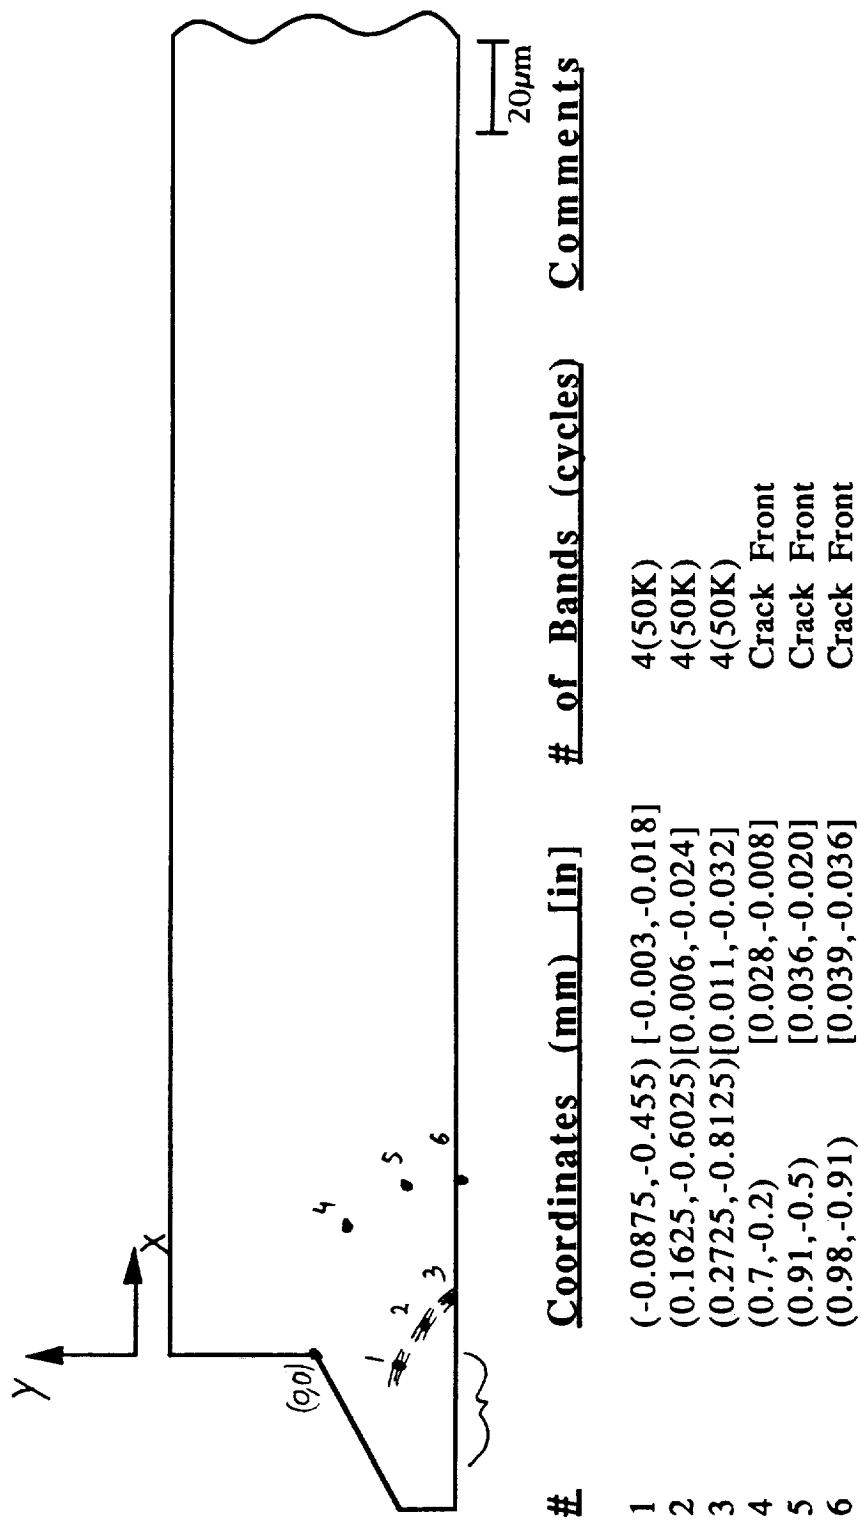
Rivet hole schematic: Upper rivet row, hole number 3J9, fatigue crack growth is in the aft direction.
